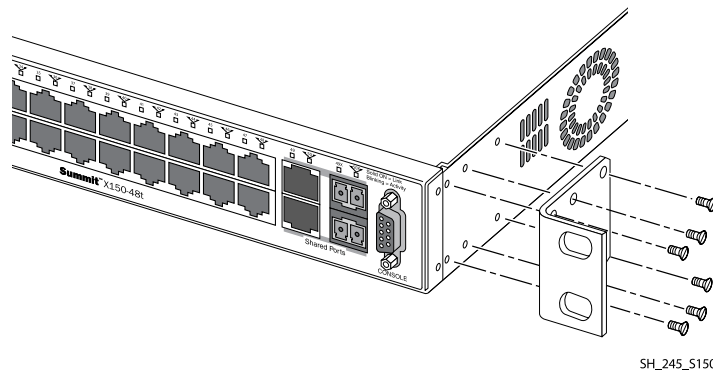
Attaching the Mounting Bracket: Summit X150 and X250e
